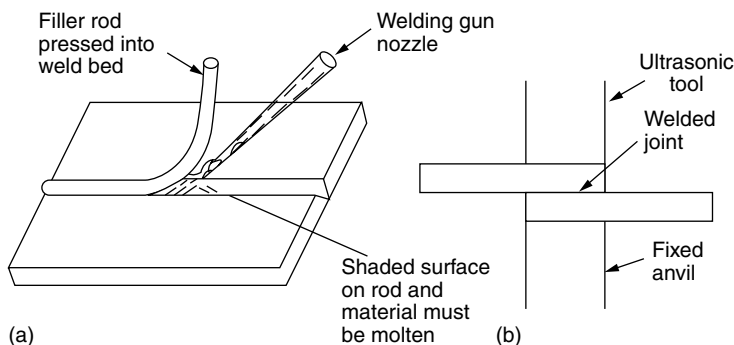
Welding of plastics: (a) hot-gas welding; (b) ultrasonic contact welding.
